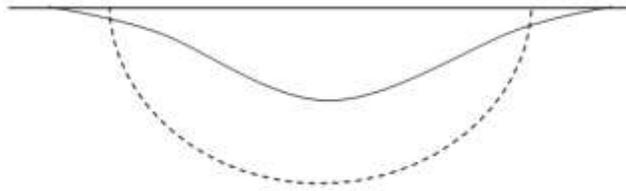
Schematic showing the shallower but wider weld pool shape due to convection dominated by either a buoyancy or surface tension gradient force
